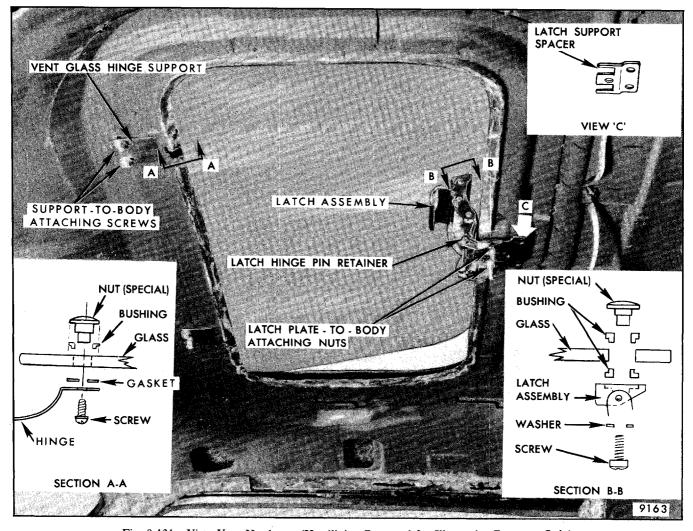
Vista Vent Hardware (Headlining Removed for Illustrative Purposes Only)
